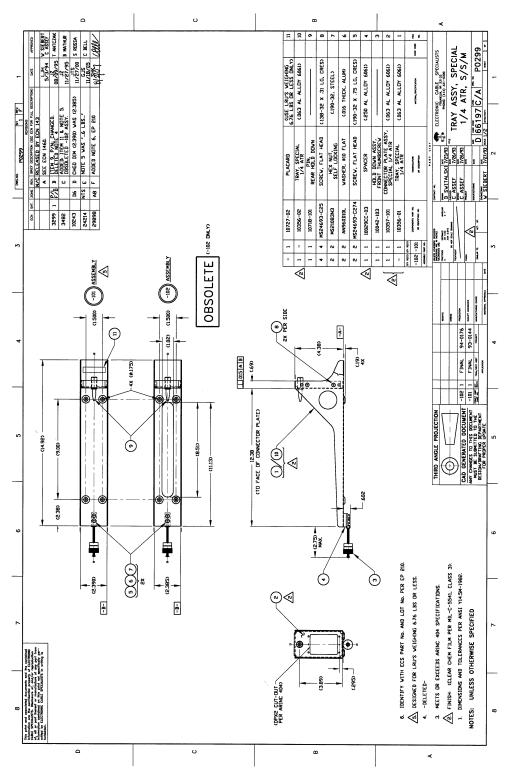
Outline drawing: SBU tray: ECS PO299-101
